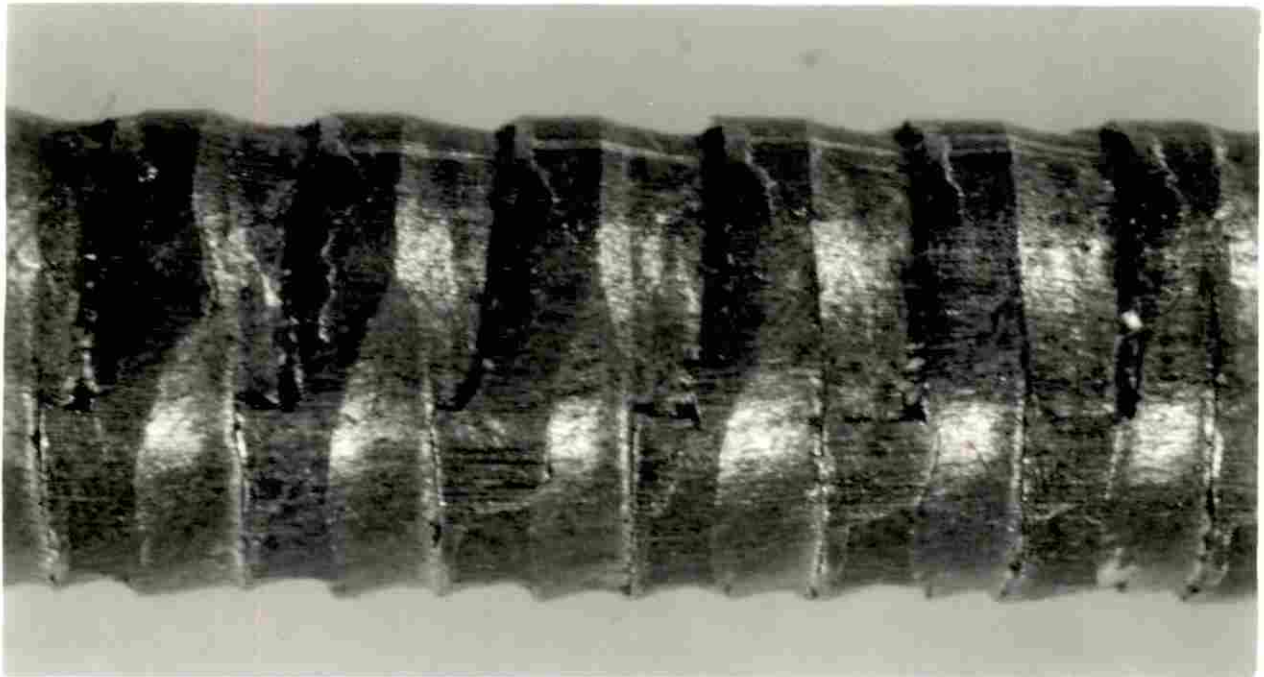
Nail No. 2119 after driving through 26 gauge aluminum (x20d).
